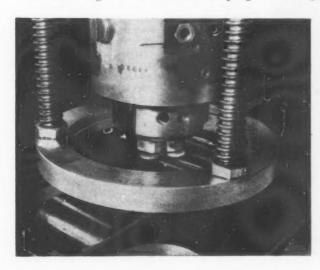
An Internal Burnishing Tool with Three Carbide Rollers is Employed to Finish the Bores of Hubs on Torque Converter Assemblies
